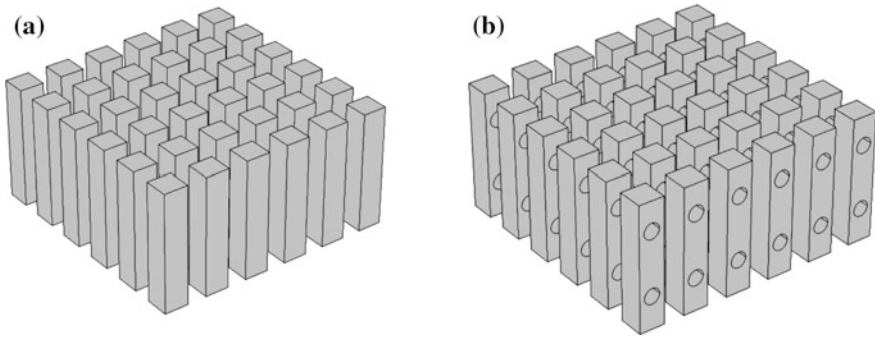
Geometry of the heat sink: (a) solid fins (b) perforated fins
